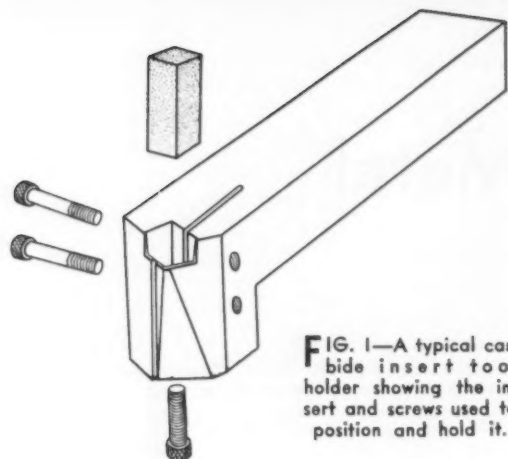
A typical carbide insert tool holder showing the insert and screws used to position and hold it.
